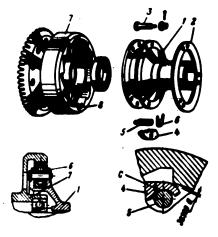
Drive Spur Gear Assembly Ratchet Mechanism Parts
